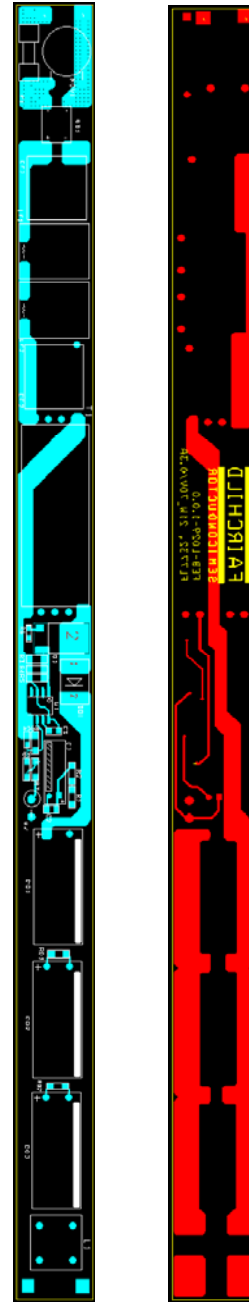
PCB Pattern Top / Bottom of Evaluation Board
